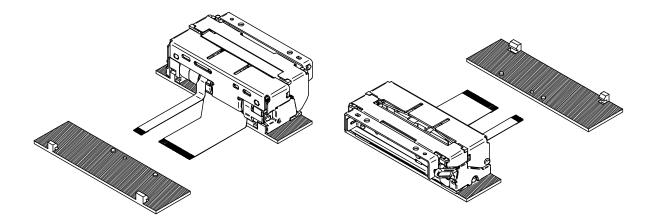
Sample for Positioning and Securing the Printer Main Body (1) (Fixed by the Mounting Part a, a', b and b')
